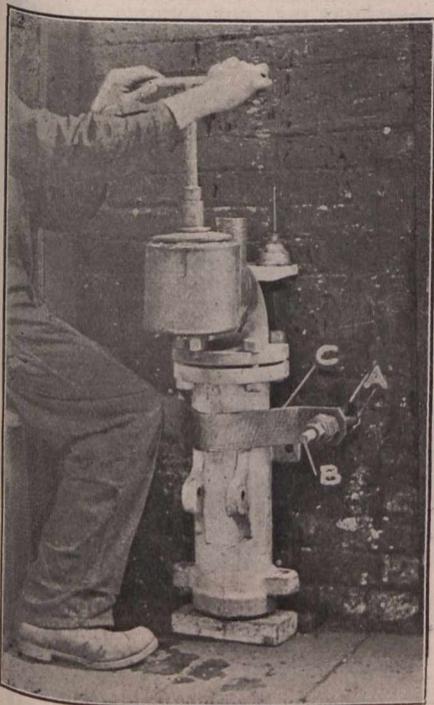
Throttle Valve Stand Clamp used in Valve Grinding.
